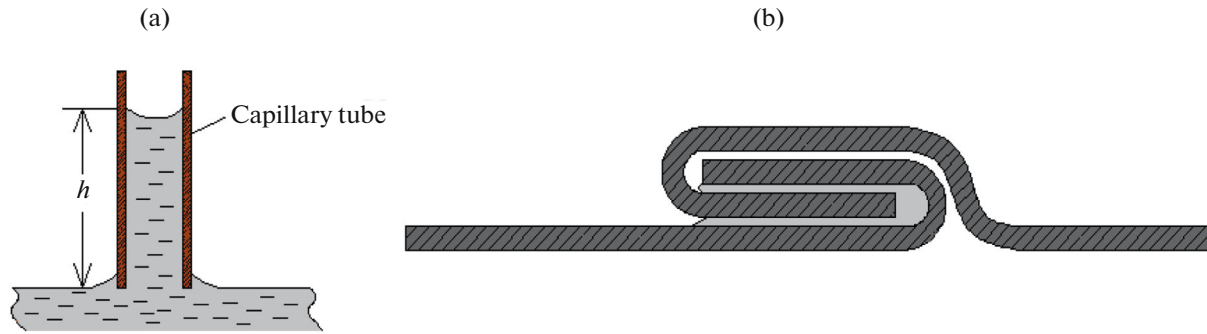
Solder penetration test in (a) tubes and (b) a connection of bent wires.
